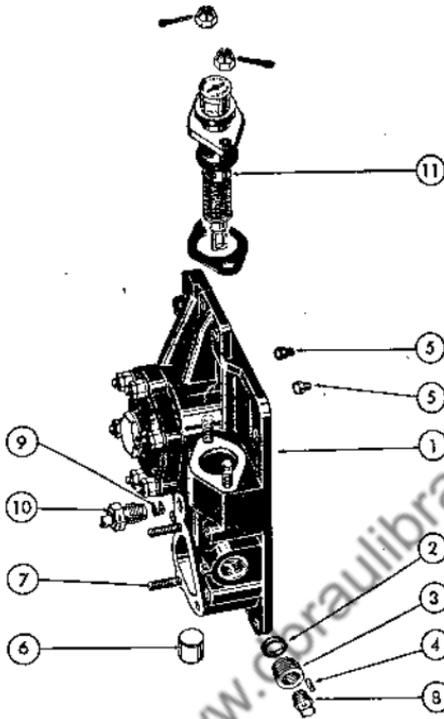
PARTIAL "EXPLODED" OF A FUEL END PLATE
